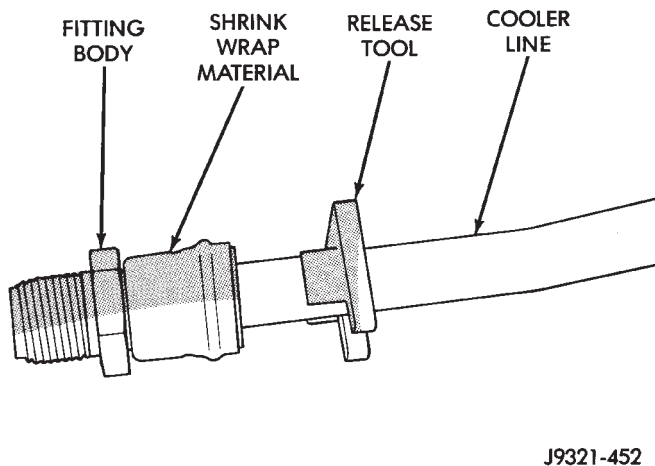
Type II Quick Disconnect Fitting And Release Tool
